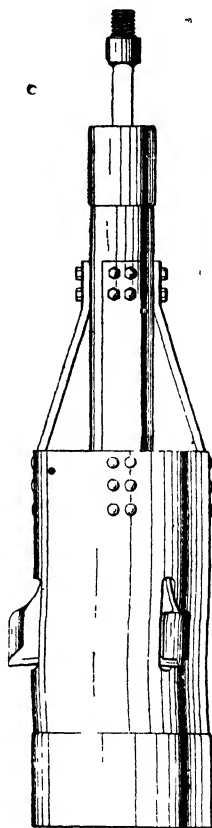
B.—EXPANDING TOOL WITH CENTRAL ROD FOR ADJUSTING CUTTERS.
